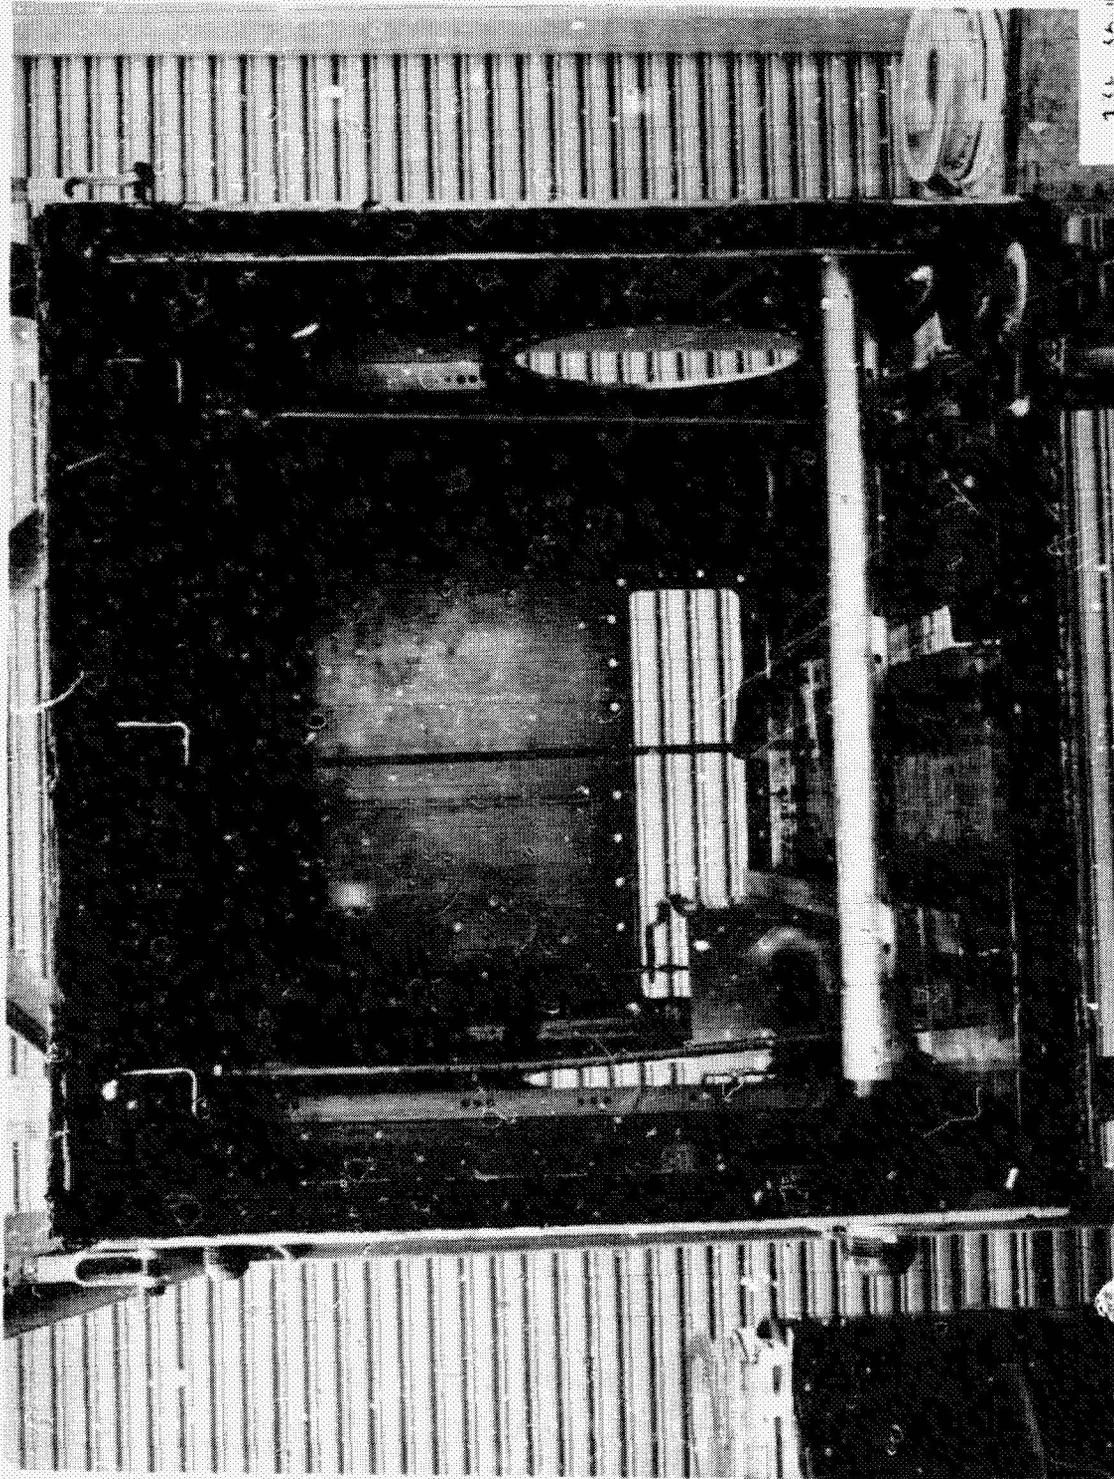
Test Tank During Final Assembly, End Panel Removed.
